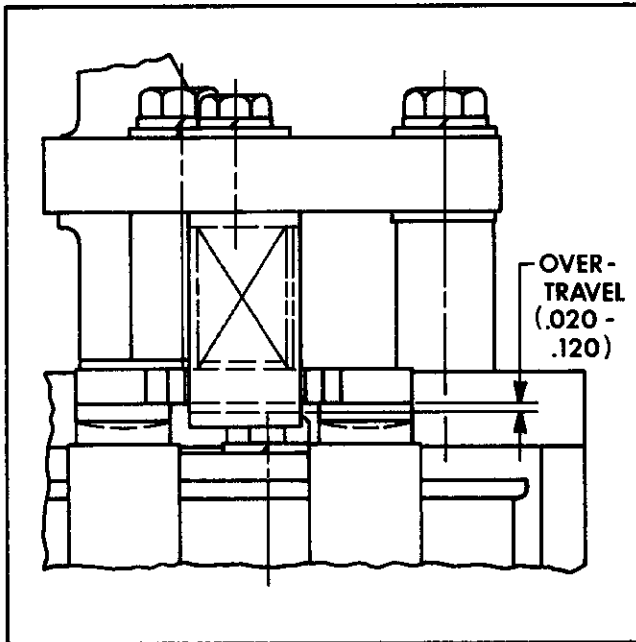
Initial Contact Overtravel Drawing 7857A64
